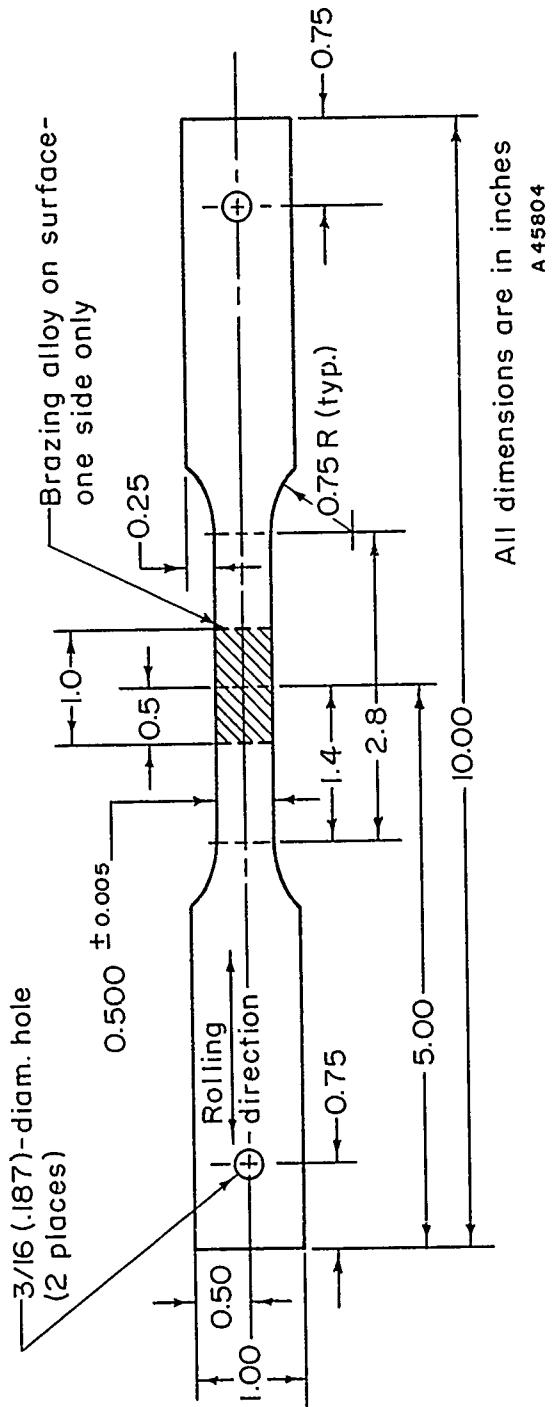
BRAZED COATED TENSILE TEST SPECIMEN
